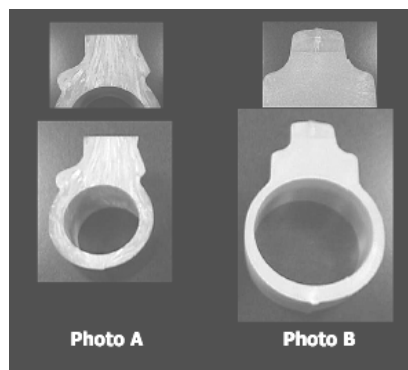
A comparison of macrostructures obtained in forgings made from: extruded rod and shaped billet. A – forged by conventional technique, B – forged by single operation (single heating) [4]
